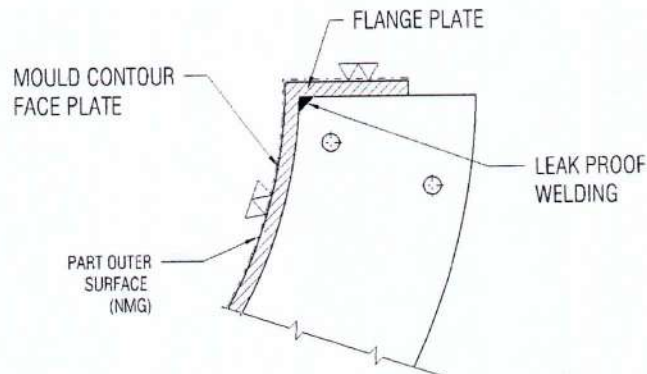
Typical leak proof welds between Faceplate and Flange plate
